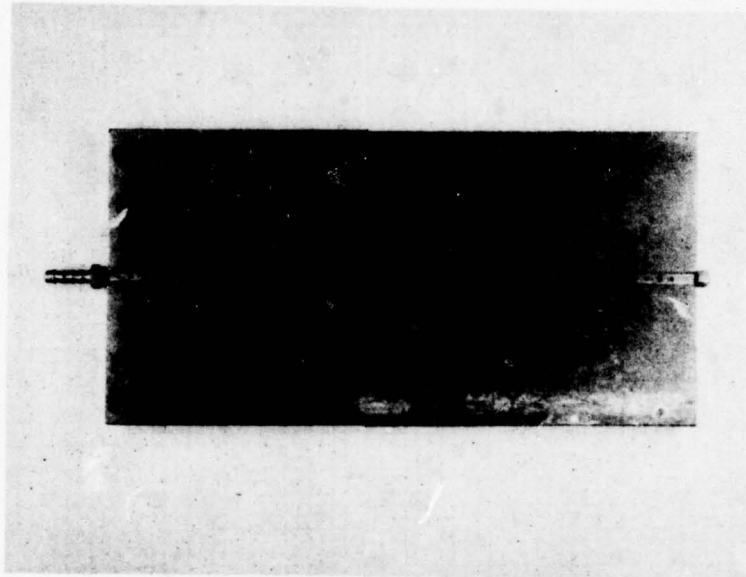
Special Copper Back Up Plate Used to Purge Back Side of Weld
